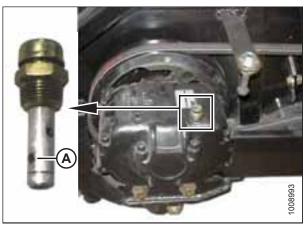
Side View of Knife Drive Box and Closeup of Dipstick
